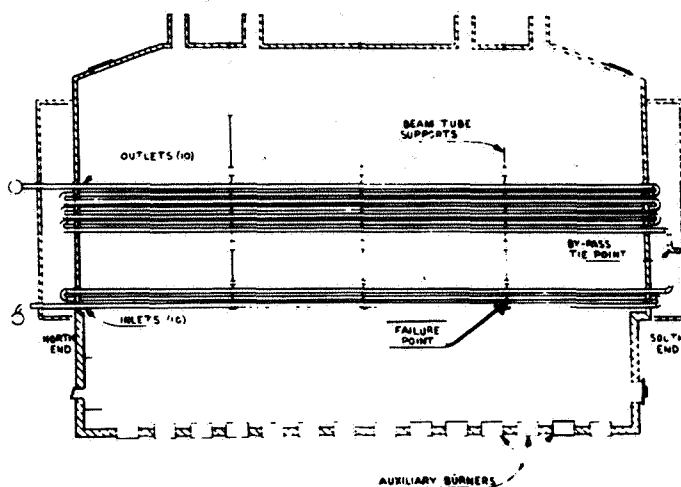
Reformer furnace convection section, side-sectional view, showing auxiliary burners and steam generating tubes.
